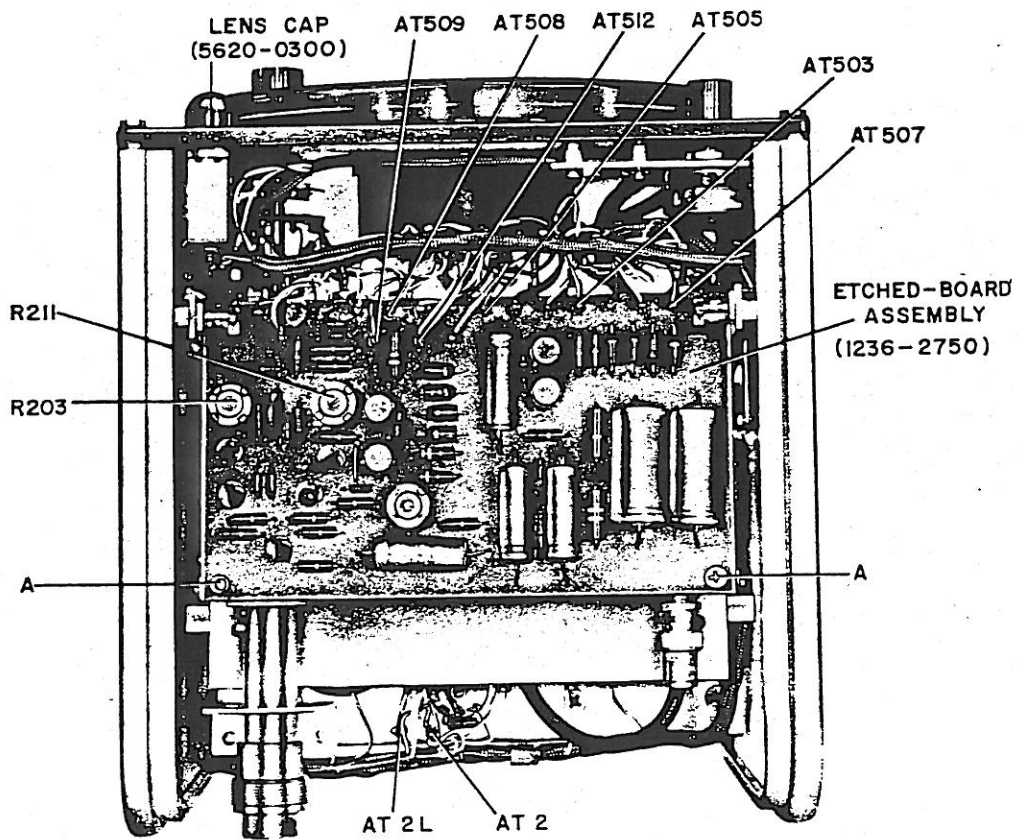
Top view of 1236 with dust cover removed. The etched-board assembly supports power-supply and expansion-amplifier components.
